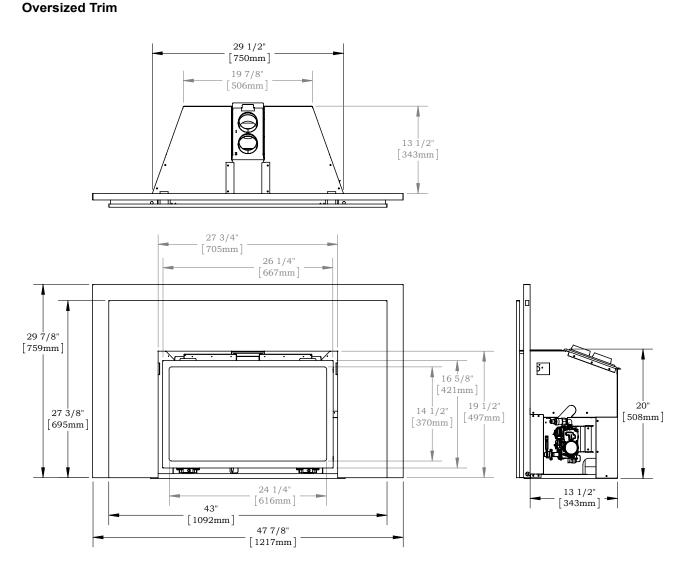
Sec.1 30DFID-S oversized trim dimensions (Tolerance $\pm \frac{1}{8}$ ") [1.25 mm]
